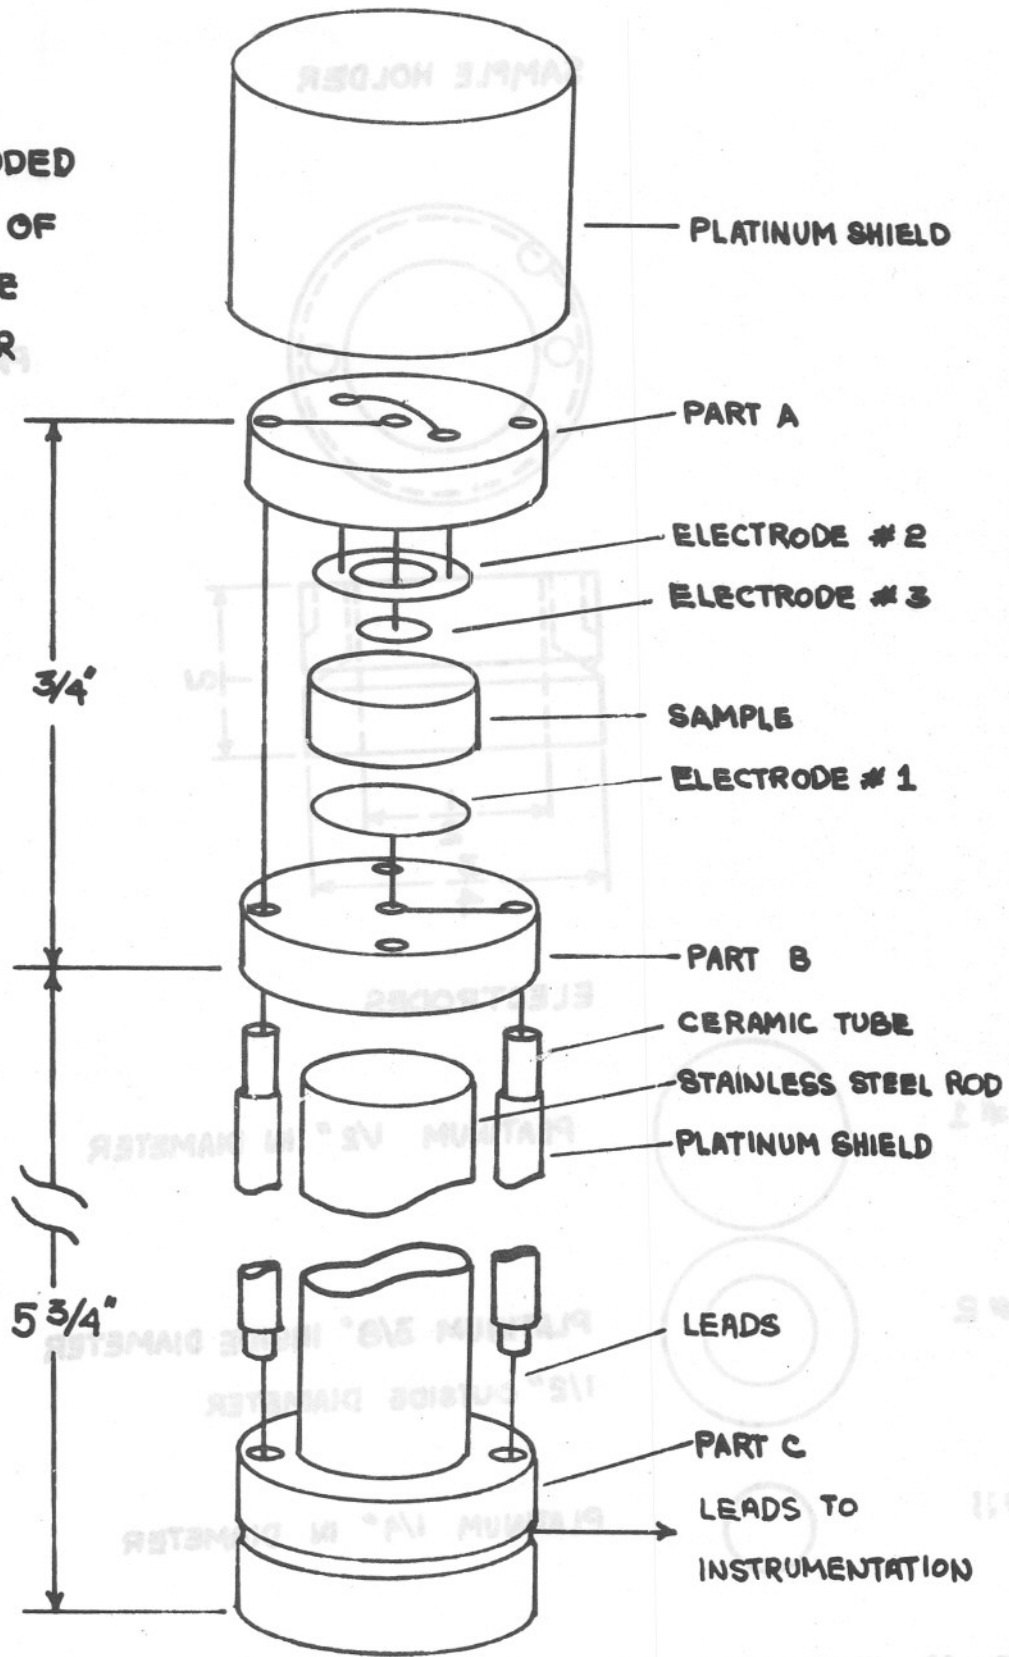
High temperature dielectric measuring setup - exploded view of sample holder.
